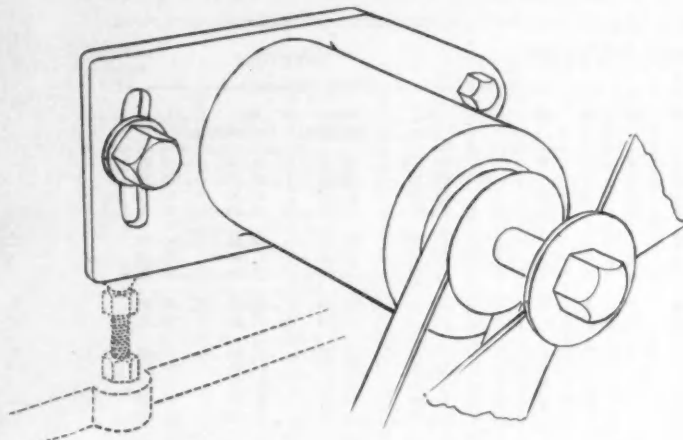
MOUNTING FOR A BELT-DRIVEN GENERATOR IN WHICH EASE OF ADJUSTMENT IS SECURED BY PIVOTING THE BASE PLATE AT ONE END AND PROVIDING A SLOTTED ADJUSTMENT AT THE OTHER. An Adjusting Screw as Shown by the Dotted Lines Would Be an Improvement
